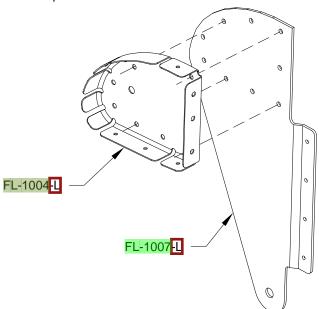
LEFT HINGE PAIR RIB SUBASSEMBLY
